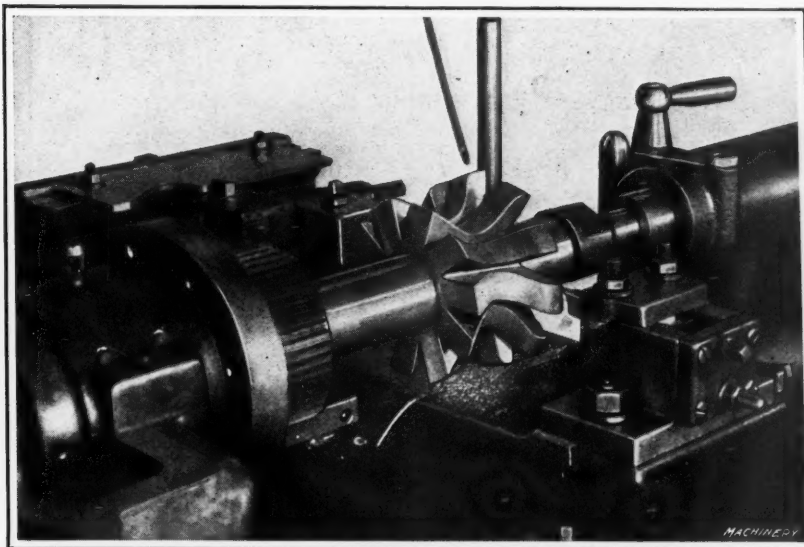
Close-up View of Cutter, Relieving Tool, Templet, and Tracer Point
